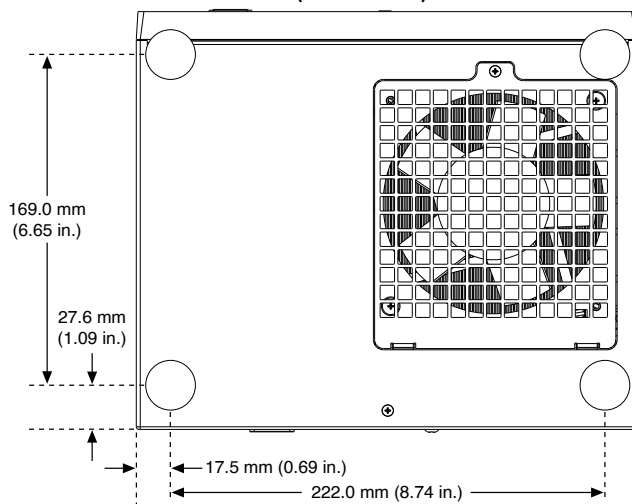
PXIe-1083 Chassis Dimensions (Bottom)
